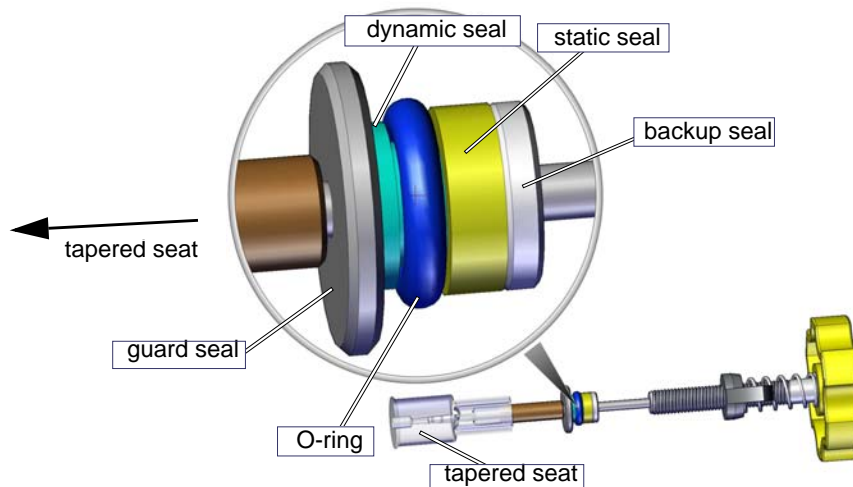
Correct Orientation of the Tapered Seat and Seal Assembly
